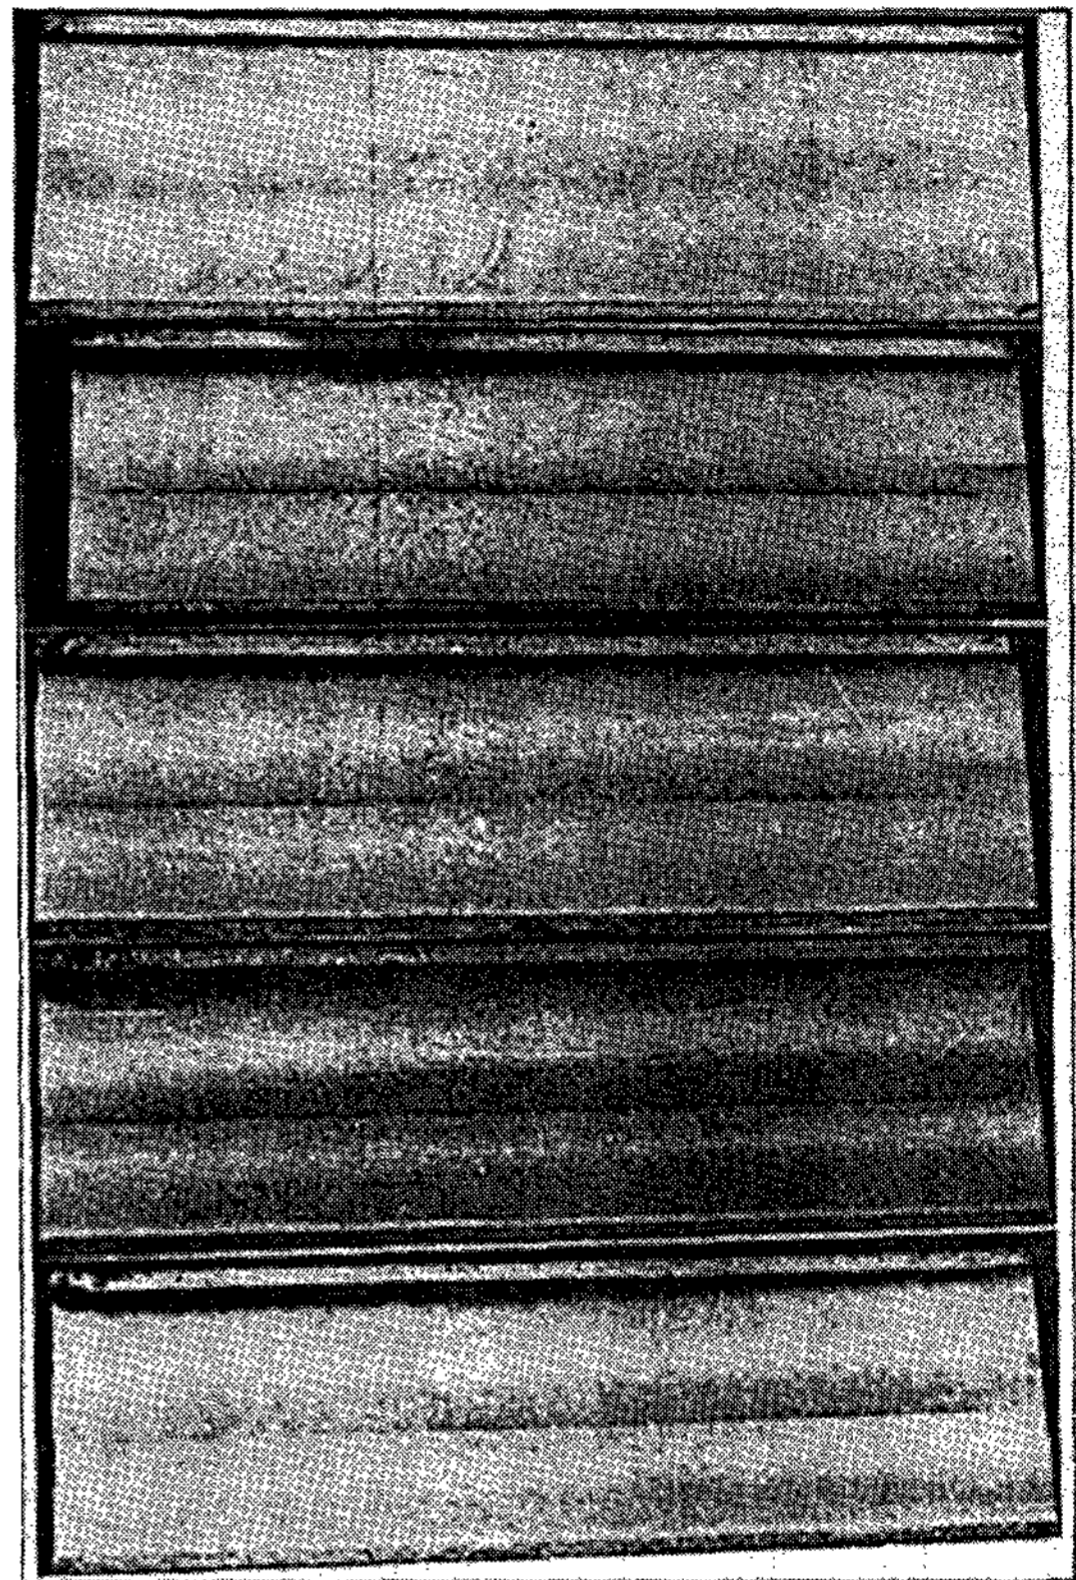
Photograph of centerline shrinkage porosity of test castings with different padding taper at constant mold temperature of 350°C ; padding taper : 0,2,3,4,5% from top to bottom.
